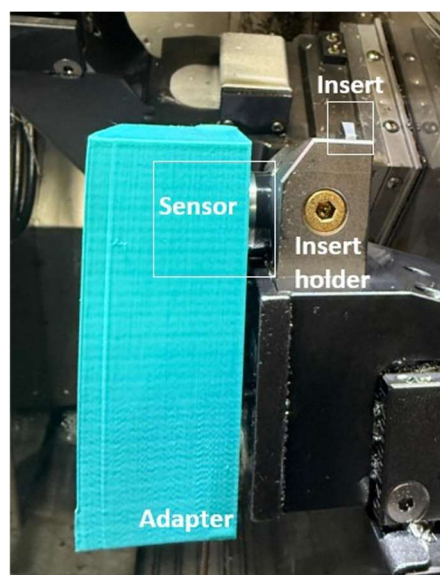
Sensor mounted using an adapter on the turning insert tool holder (Position 3)
